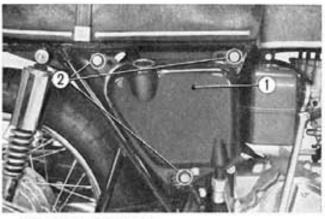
① Oil tank ② Oil tank mounting bolts
